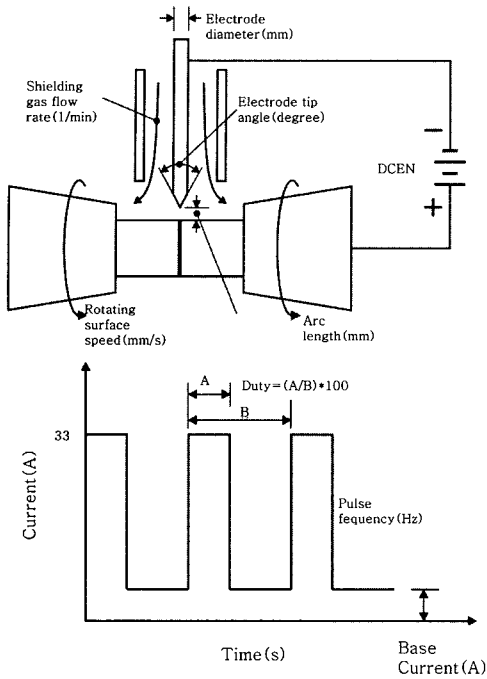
Schematic drawings showing experimental setup and welding parameters
